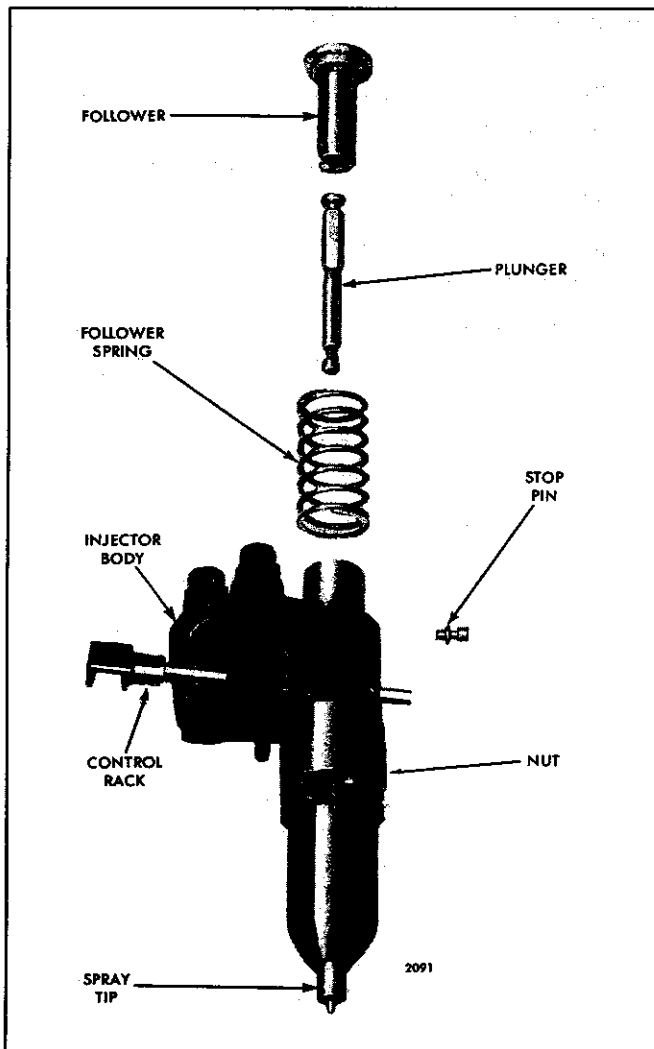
Injector Plunger, Follower and Relative Location of Parts
